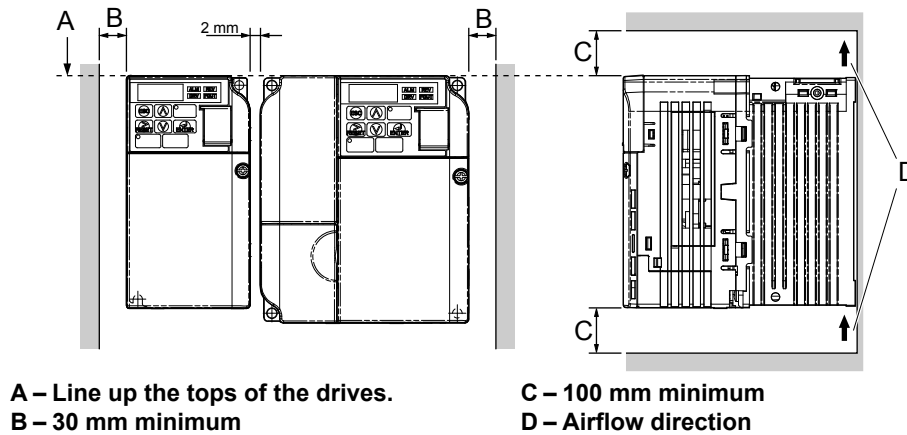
Space Between Drives (Side-by-Side Mounting)
